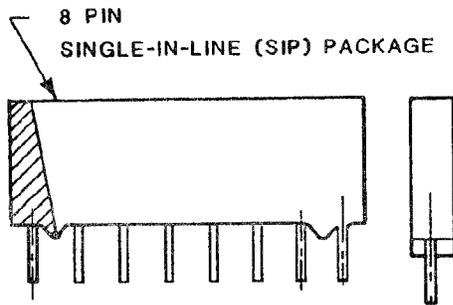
Outline drawing of a style RZ050 package configuration.
